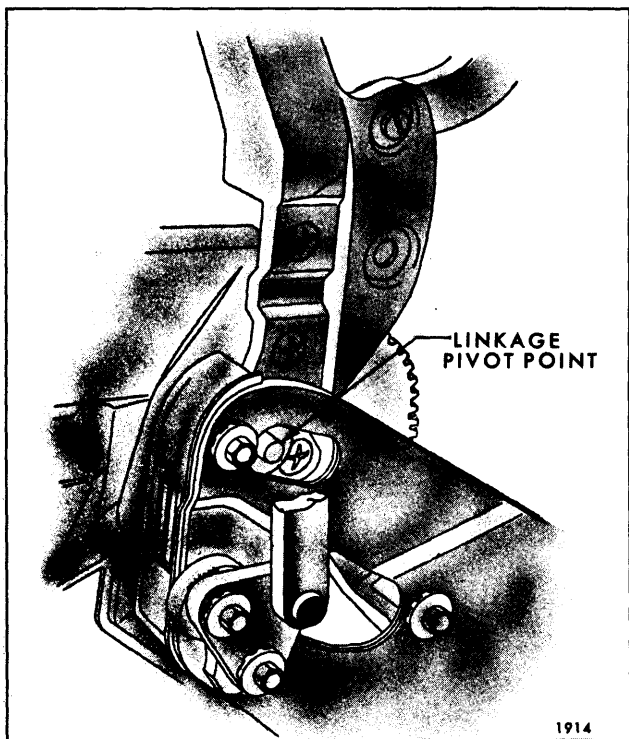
Folding Top Linkage Pivot Point "Z" Styles
